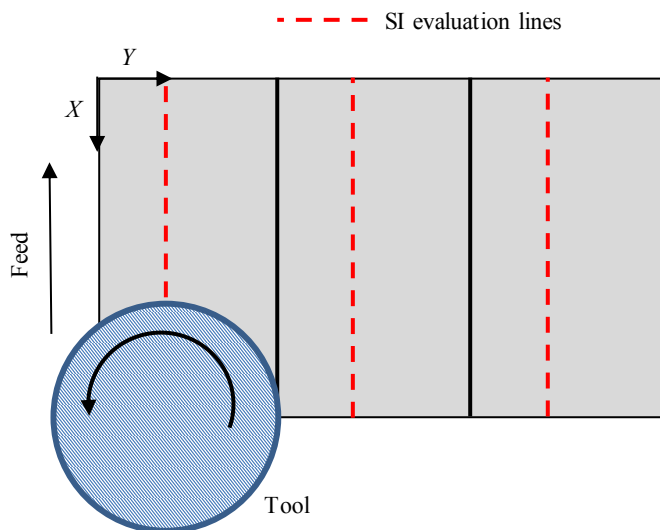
Top view of the machined specimen showing the lines where surface integrity was evaluated.
